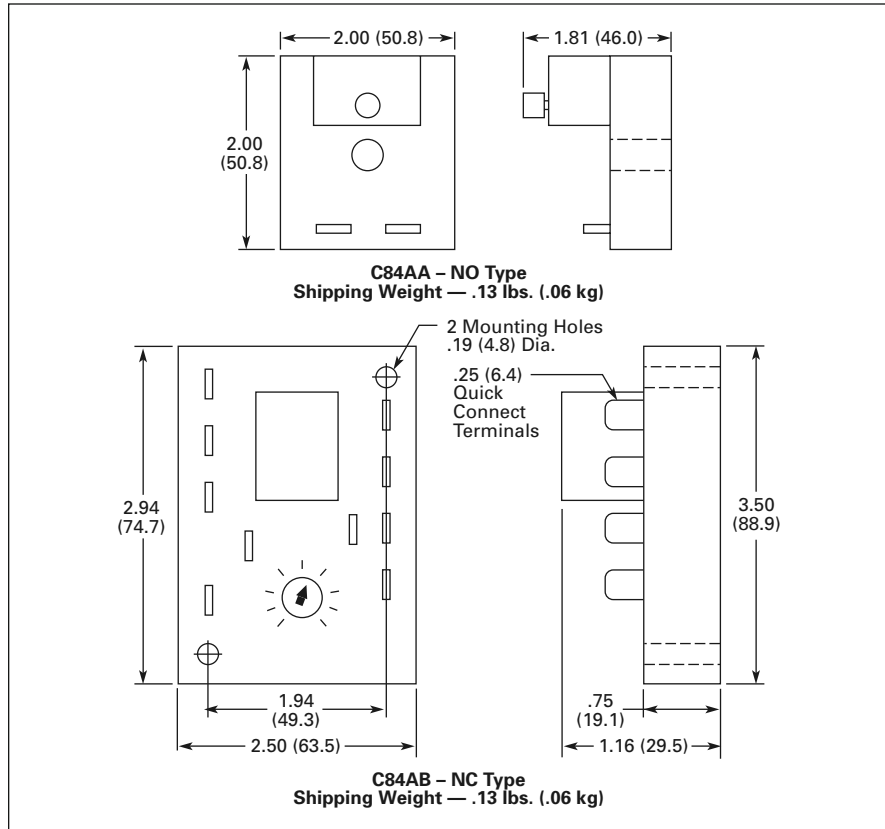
Approximate Dimensions in Inches (mm) and Shipping Weights
